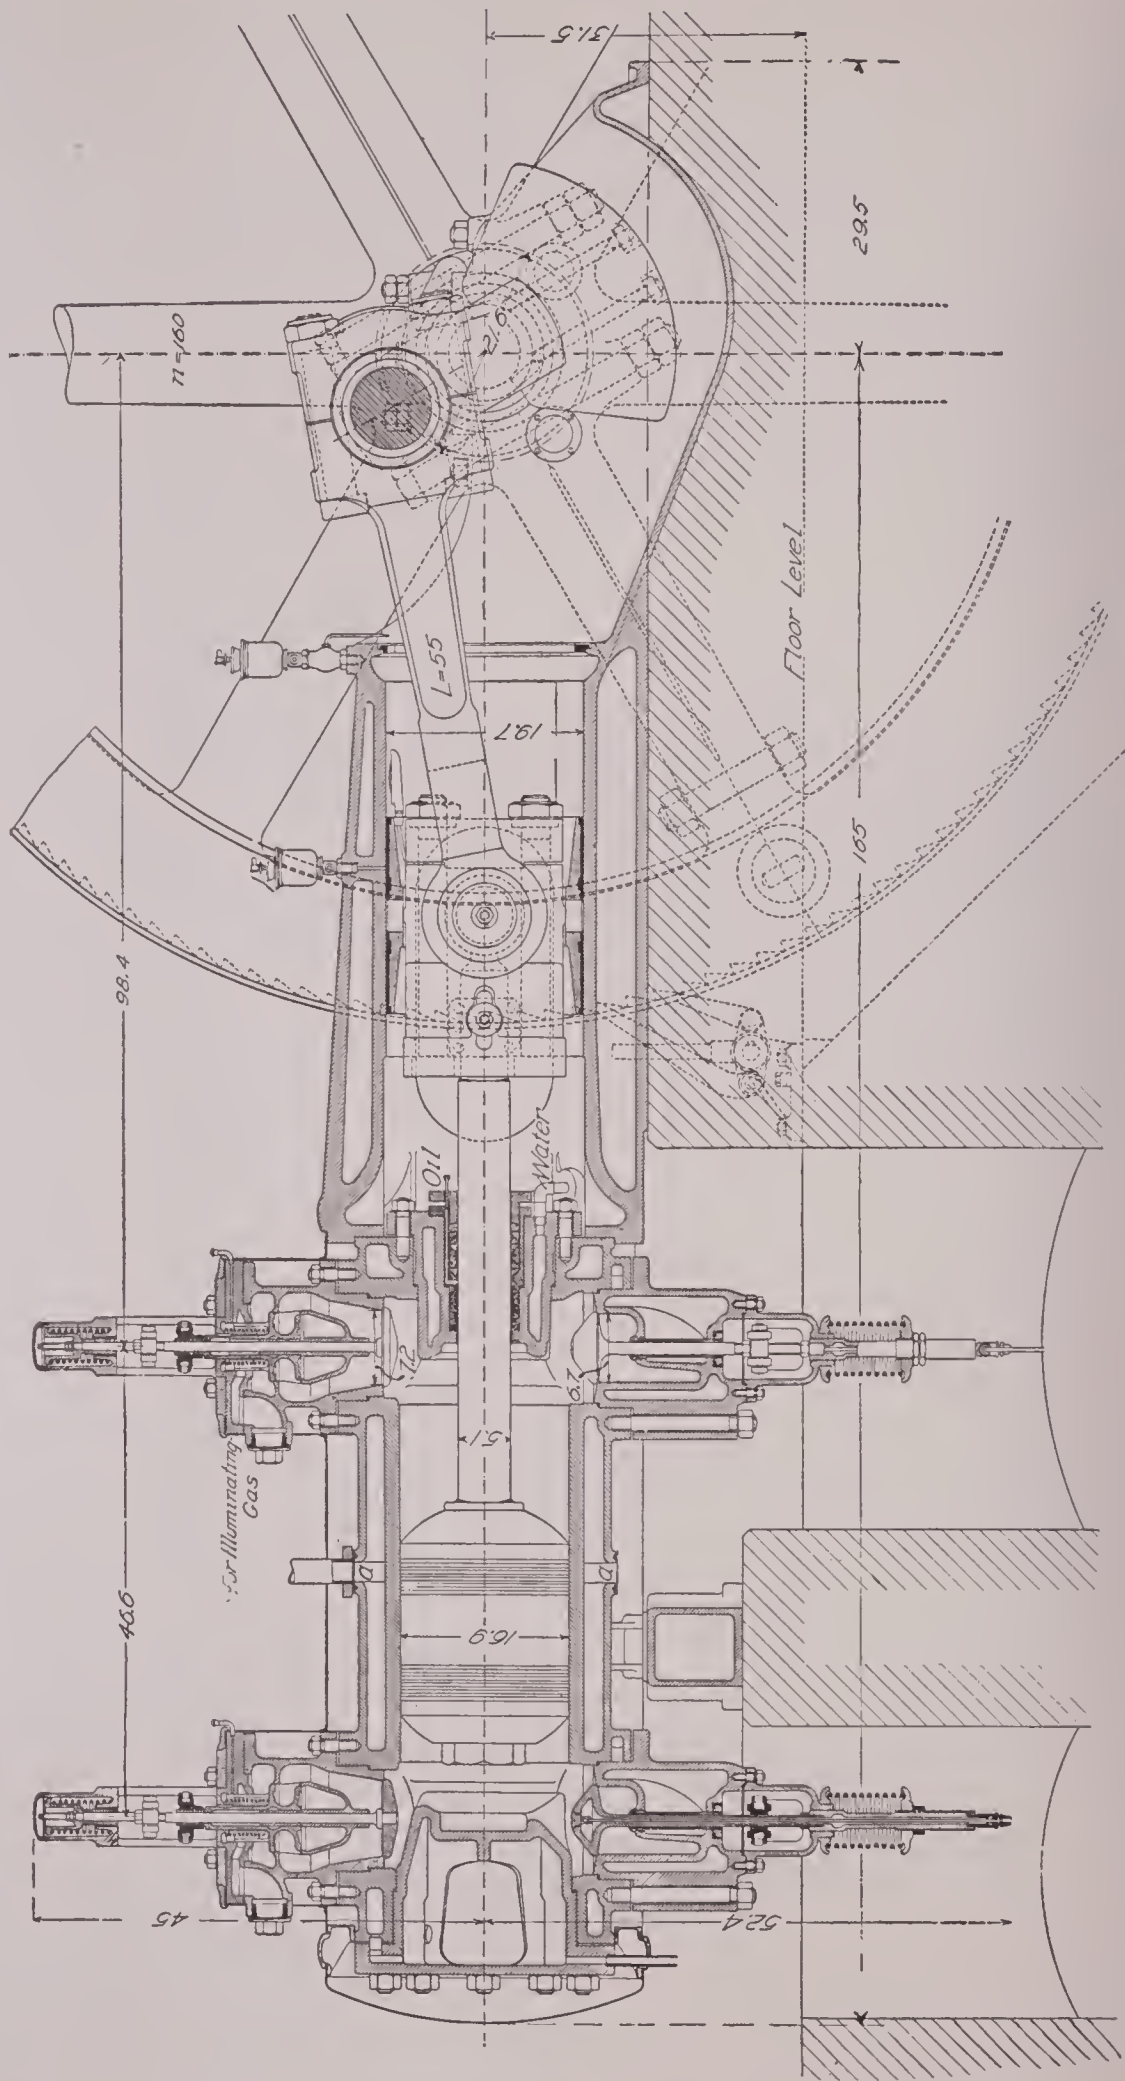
Cross-section of a 100-120 H.P. Double-acting 4-cycle Engine. Langen & Wolf, Vienna. (For Valve Gear, see Fig. 277.)
